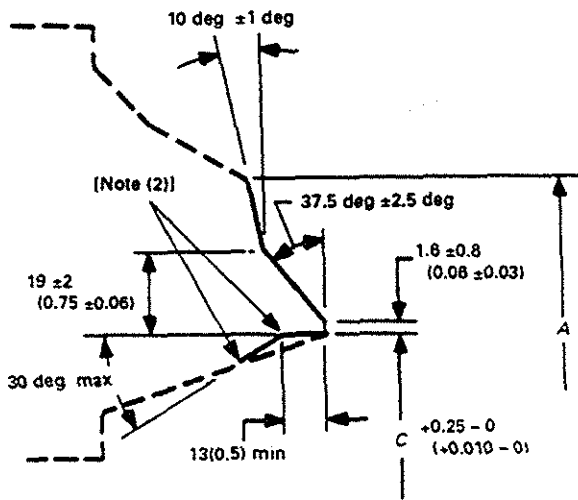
TYPICAL WELD BEVEL DETAILS FOR WALL THICKNESS OVER 22 mm (0.88 in.)
